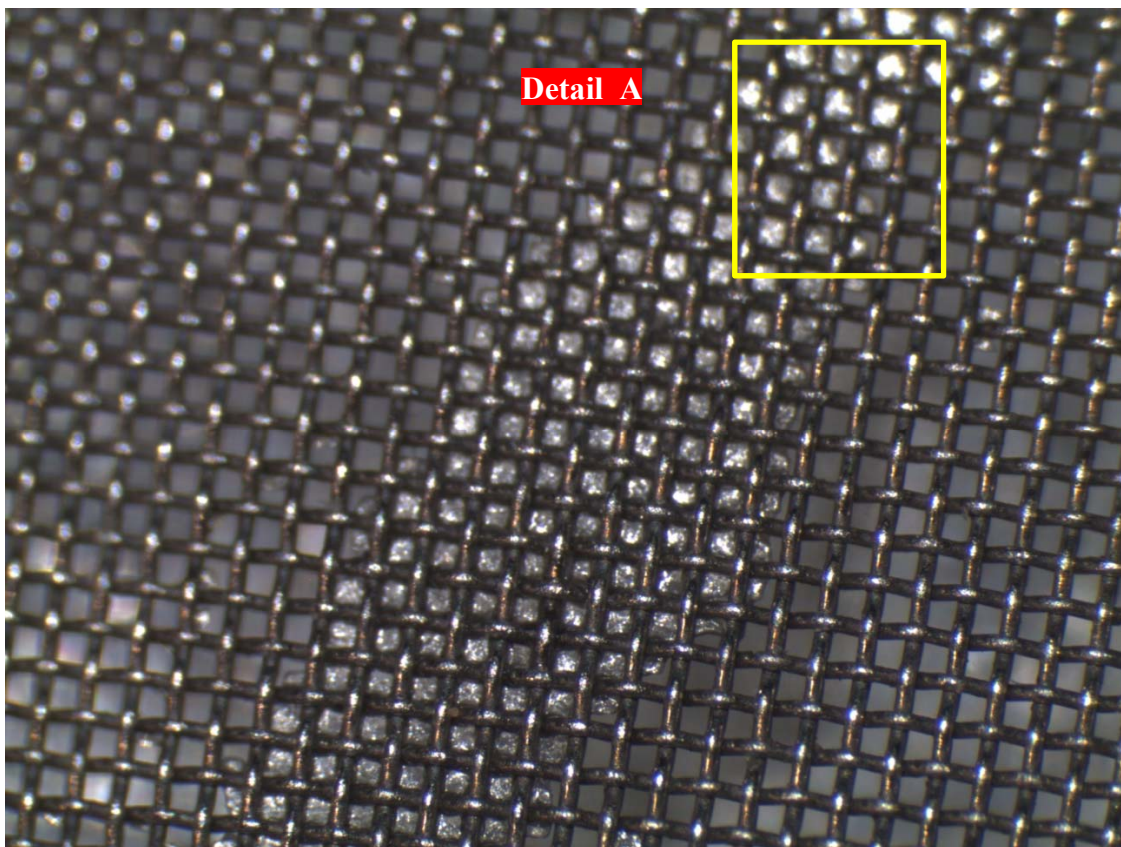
The fuel filter in the stereo macroscope showing its local formation layer of acrylic resin.
